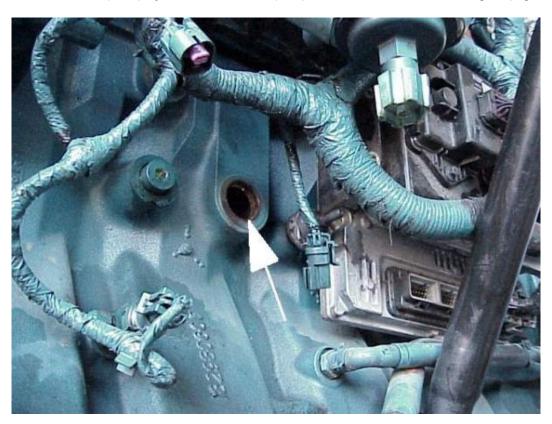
Freeze Plug or Block Heater Removed Shown at Arrow
